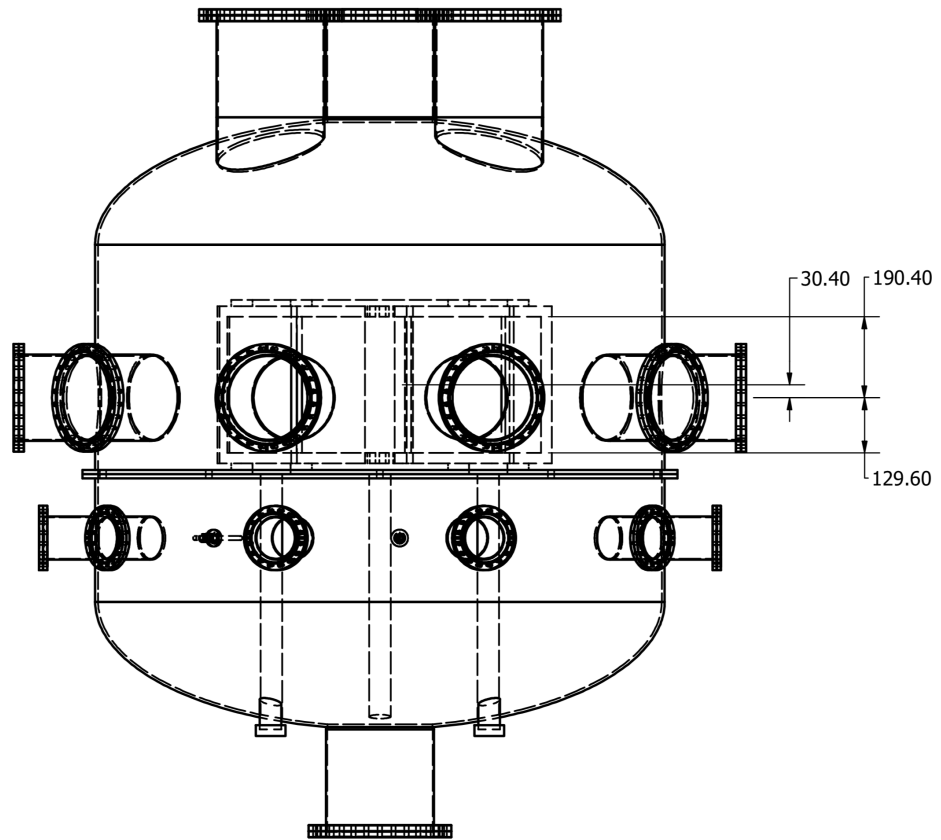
Side view diagram of MEDUSA-CR vacuum vessel in millimeters.
